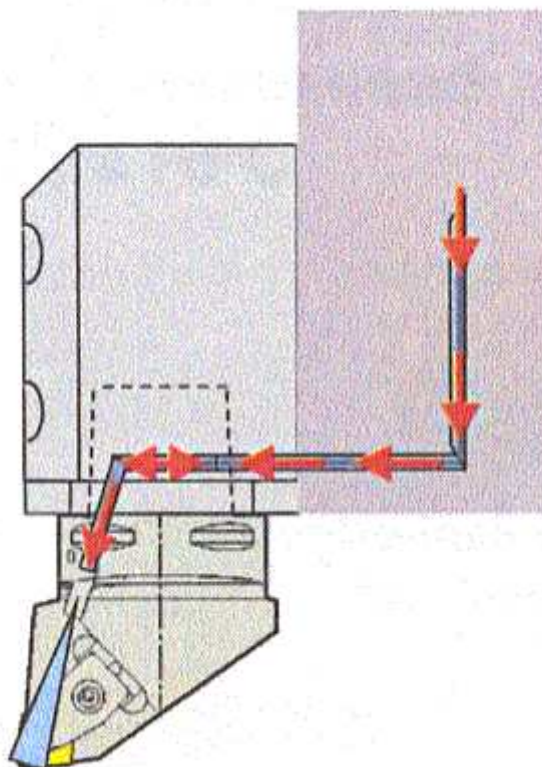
Schematic illustration of a tool holder used for machining under high pressure coolant supply (SECO TOOLS, 2002b).
